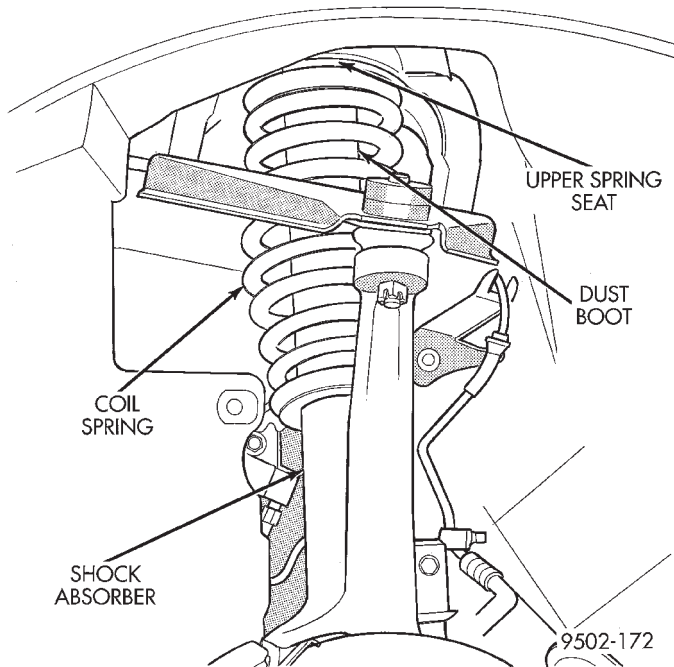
On Vehicle Shock Absorber Assembly Inspection
